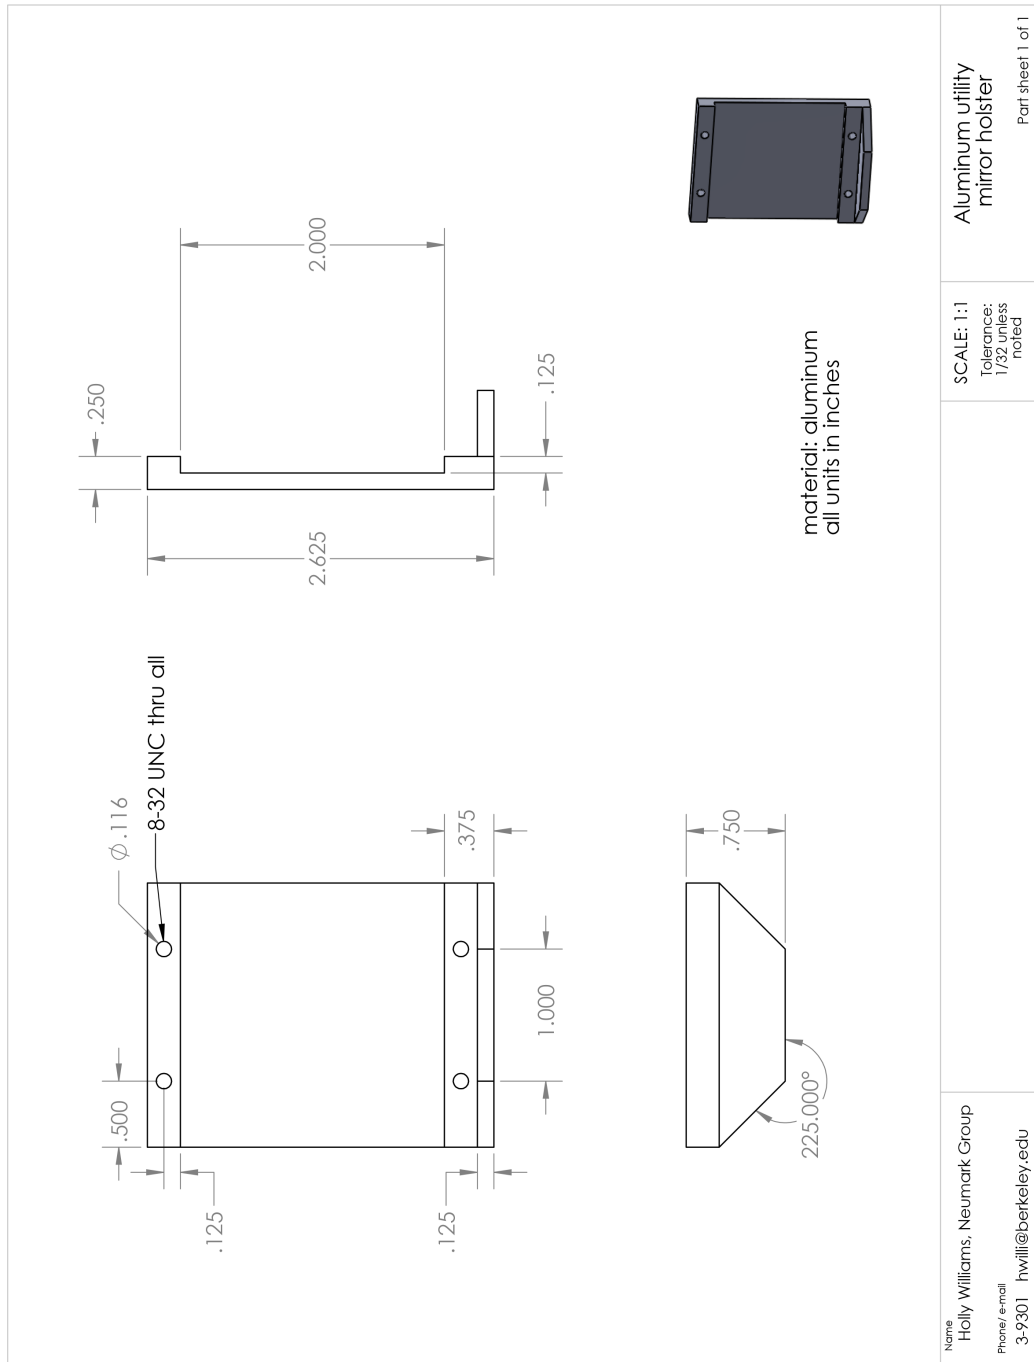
The holster for the aluminum utility mirror. Two strips of Teflon sit over the 8-32 bolt holes to hold the mirror in place. Toe clamps will be used to fasten the holster to the stage breadboard. The holster is made of aluminum.
